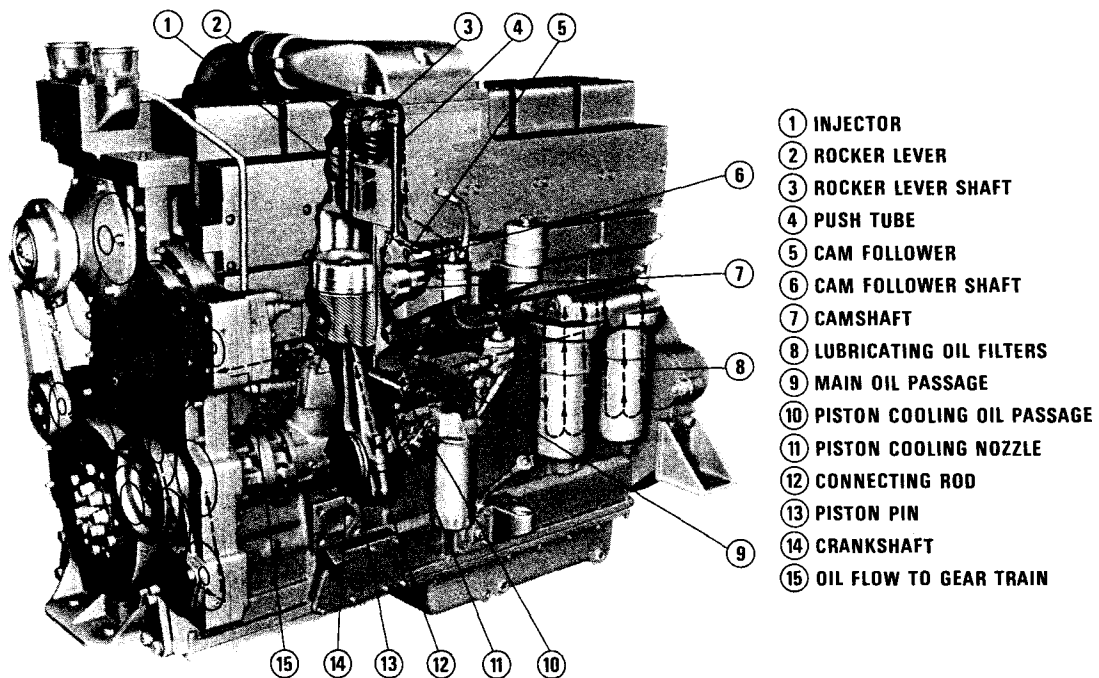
, (LWC-28). Lubricating oil flow KT(A)-1150 Series Engines
